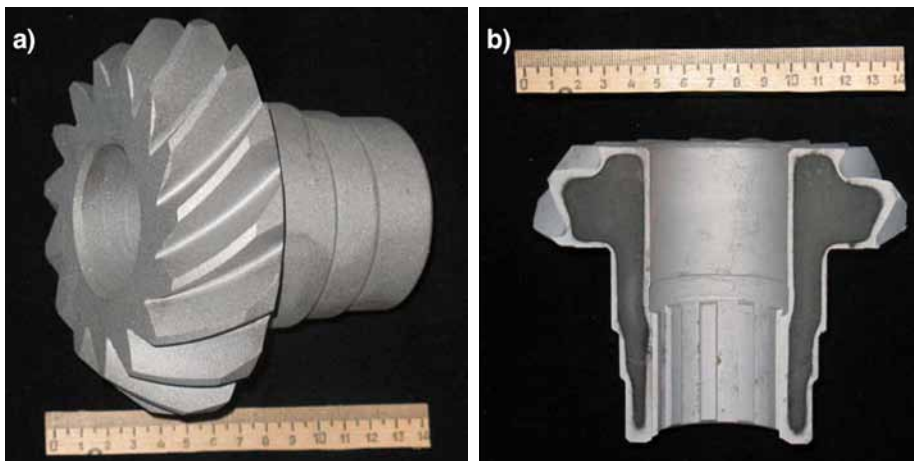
TSH (through-heating for surface hardening) steel's uninterrupted induction-hardened pattern is obtained on a spiral bevel gear (courtesy ERS Engineering Corp.).
